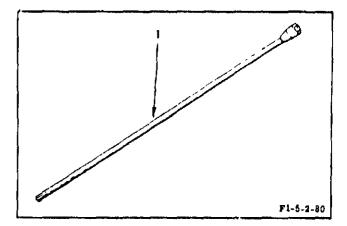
Inspection Check Fixture T-5037817
